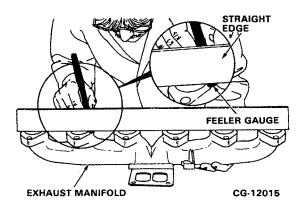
Checking for Warpage (With One-piece Manifold Shown) {Method One}
